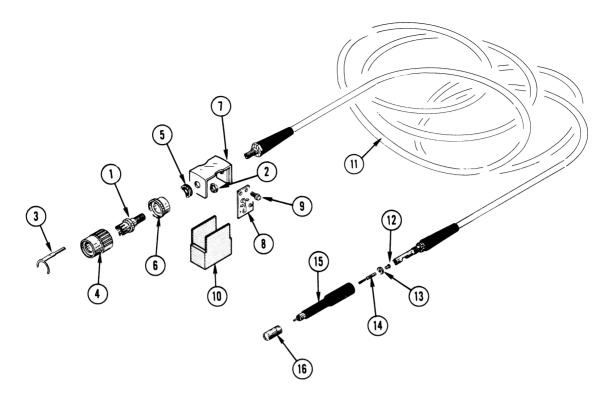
P6053 (6 foot cable) replaceable parts.
